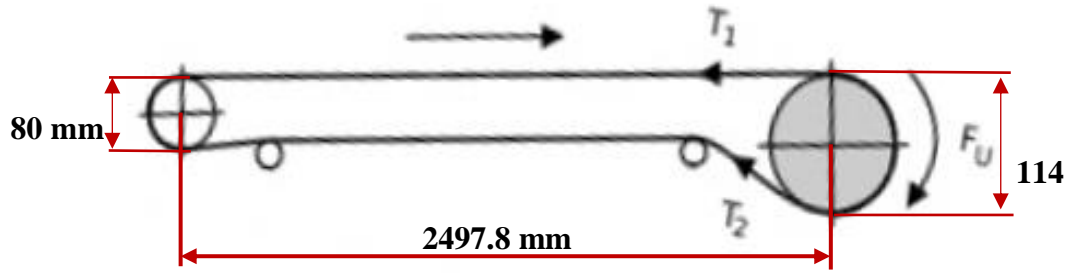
cross section view of the belt shape, main drums and idler rollers
